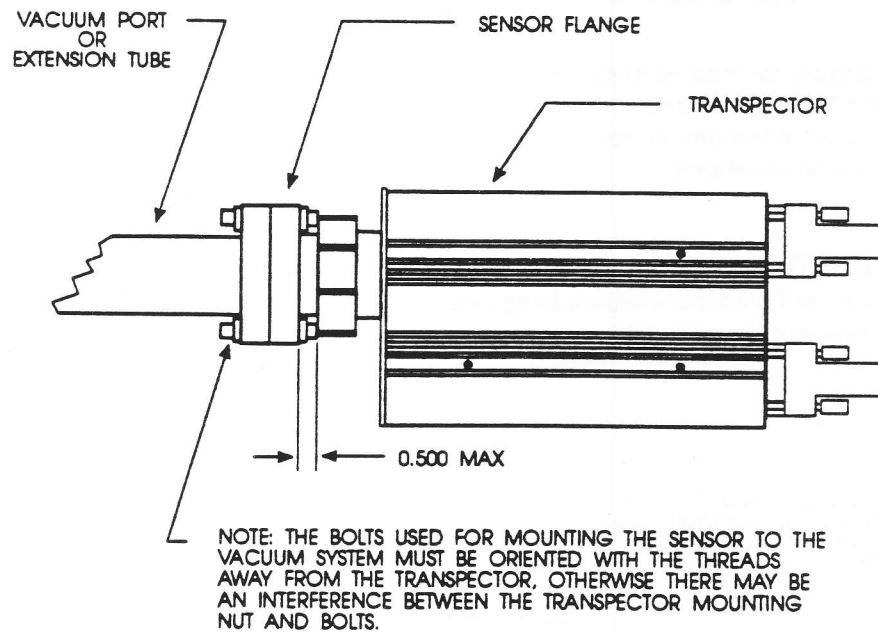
Sensor and Transpector Mounting (911-090 A)
